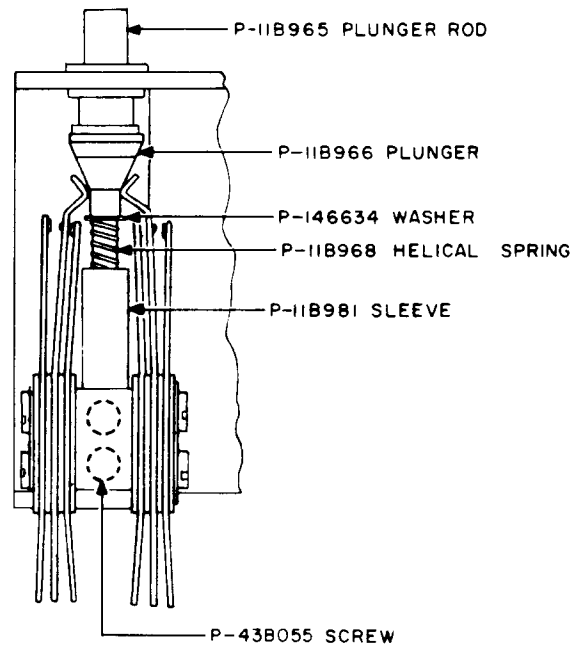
Key Unit Assembly Used on 614- and 615-Type Keys
